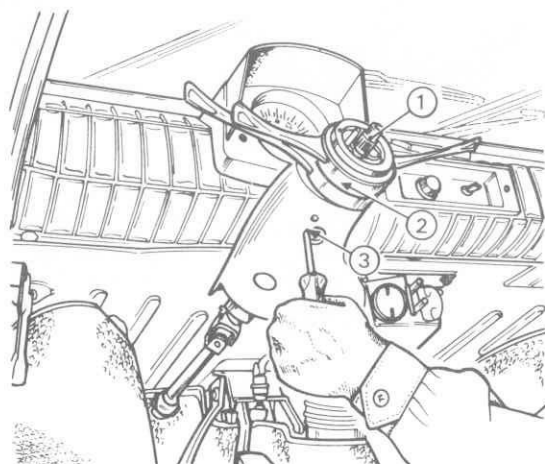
15 To remove the indicator switch 2, remove the steering wheel from upper column at 1 and remove screw 3
